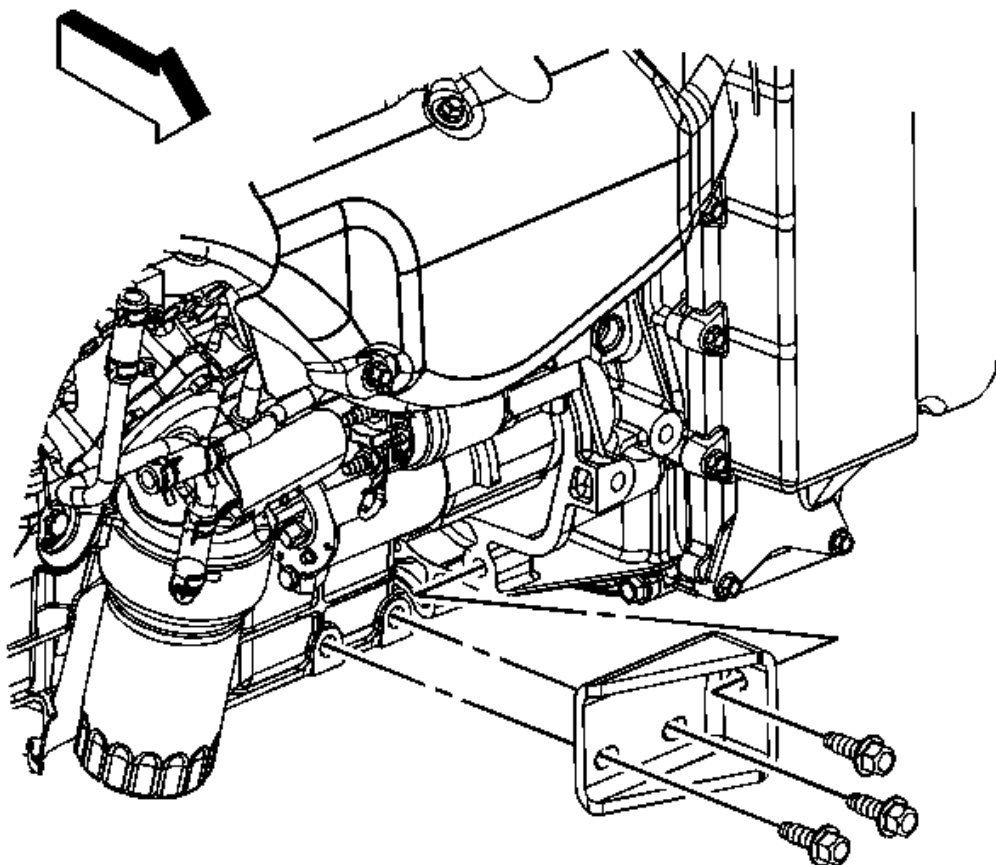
View Of Front Transaxle Brace & Engine Bolts
